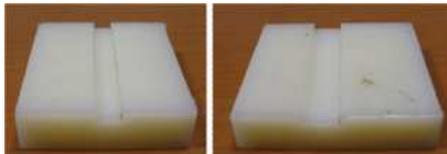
PA lower dies for forming straight ribs: 6 mm (left) and 10 mm (right) width of the rib
